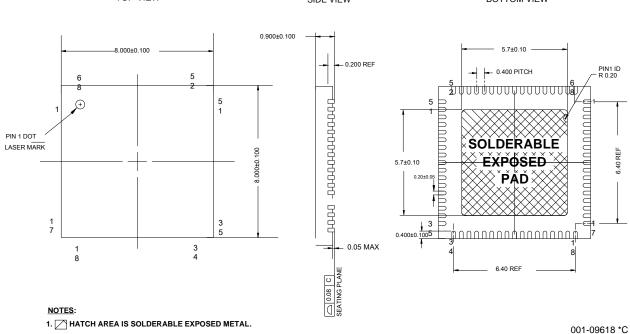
68-Pin QFN 8x8 with 0.4 mm Pitch Package Outline (Sawn Version)
